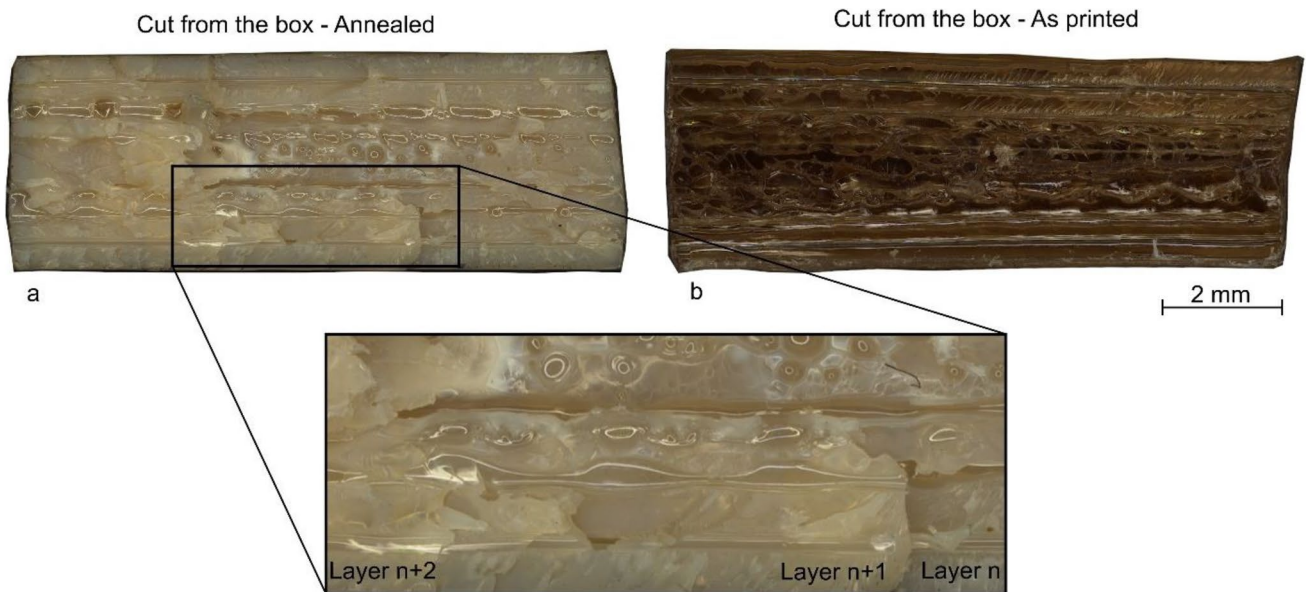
Fracture surfaces of cut samples under a annealing and b as-printed conditions
